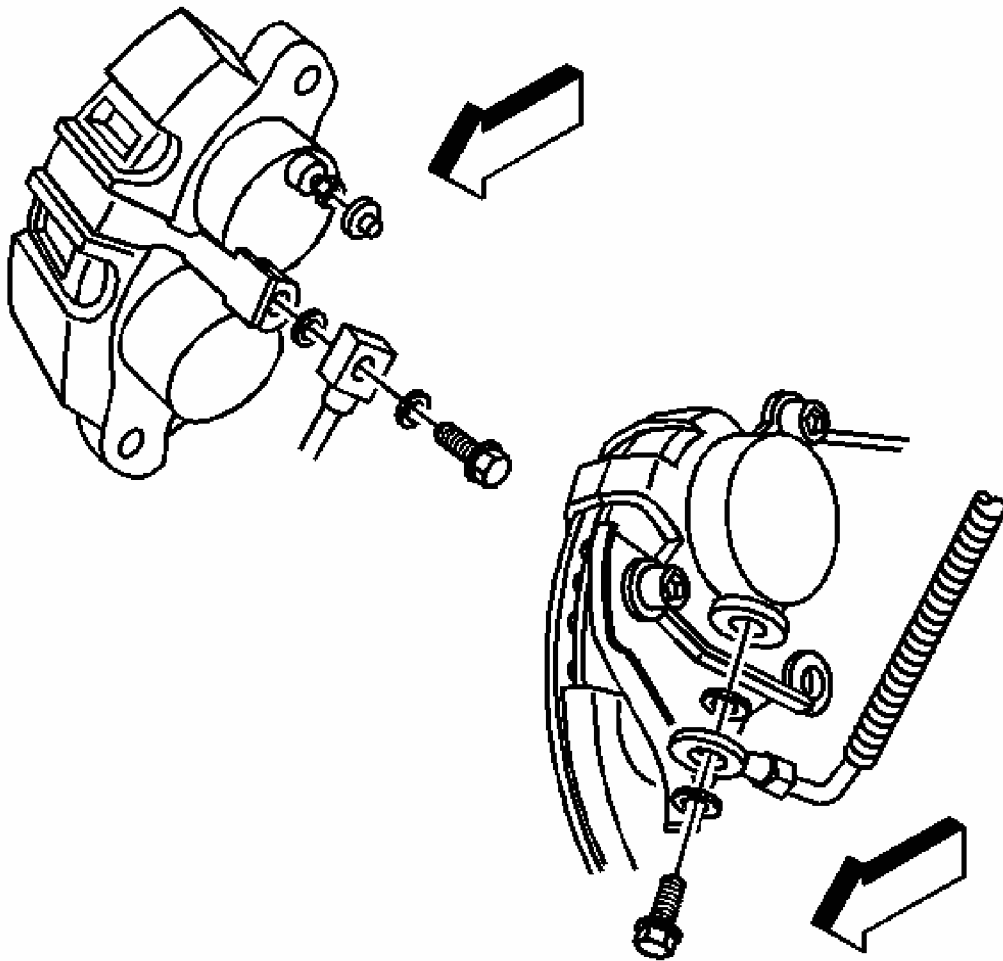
View Of Brake Hose At Brake Caliper
